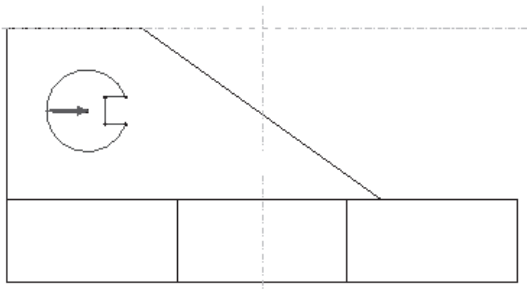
Sketch for the extruded cut and arrow showing the direction of material removal
